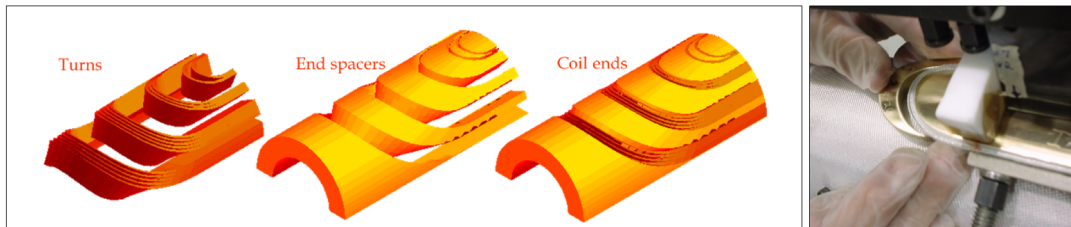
Left: separated view of the coils (Turns), end spacers and Coil ends. Right: inserting a metallic spacer around the pole turn.
